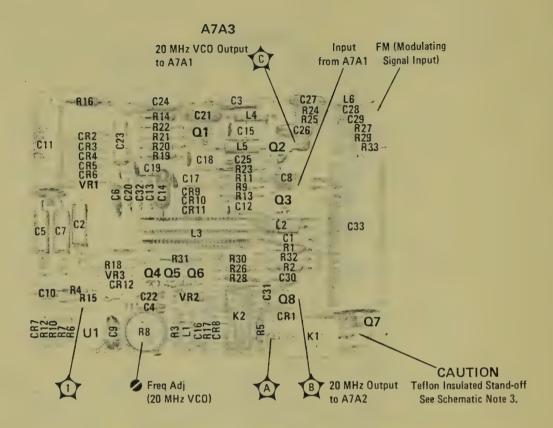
A7A3 20 MHz VCO Assembly Component Locations (Errata)
